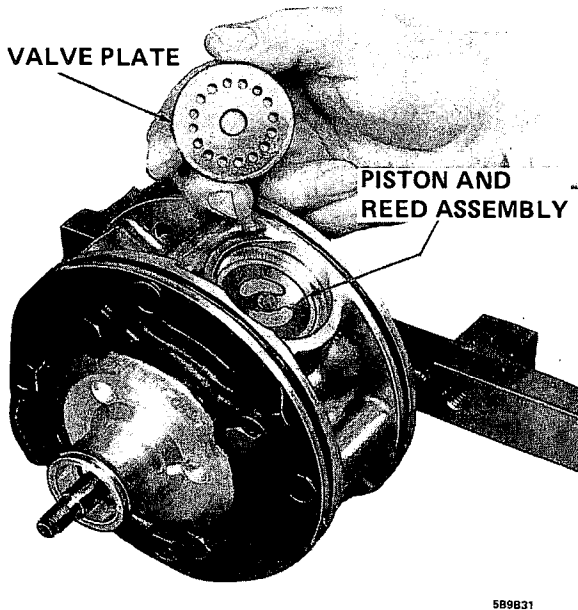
B-56 - Valve Plate Removed - 4 Cylinder Compressor
